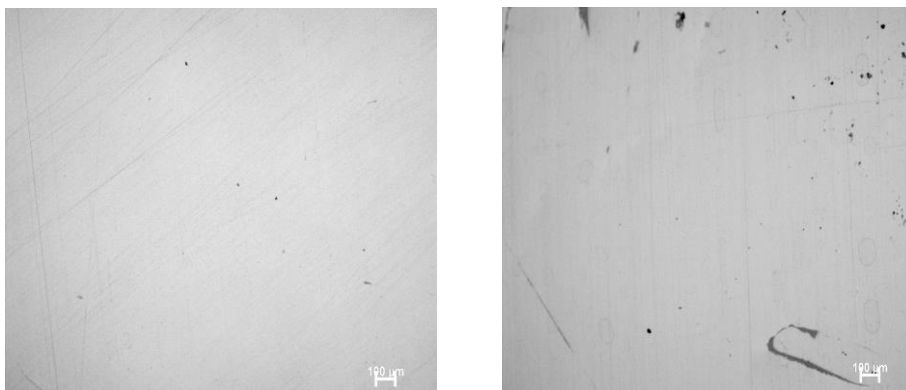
Surface of the workpiece viewed through the Zeiss Axio Microscope
